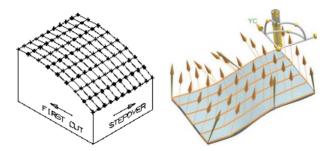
Tool axis control points over the surface to be machined (NX CAM) [19].
